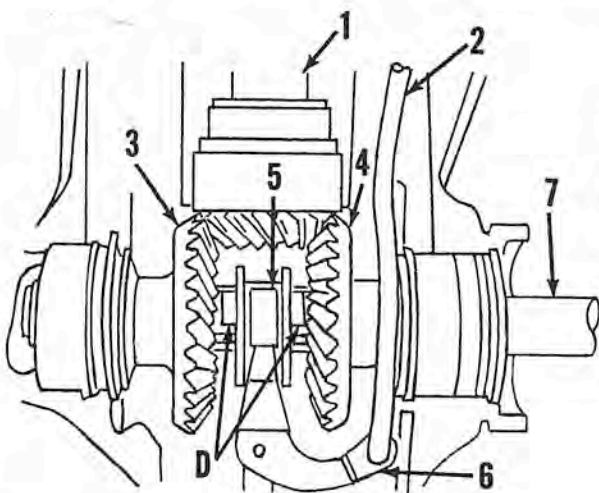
Schematic view of gearcase assembly showing shifting mechanism.
